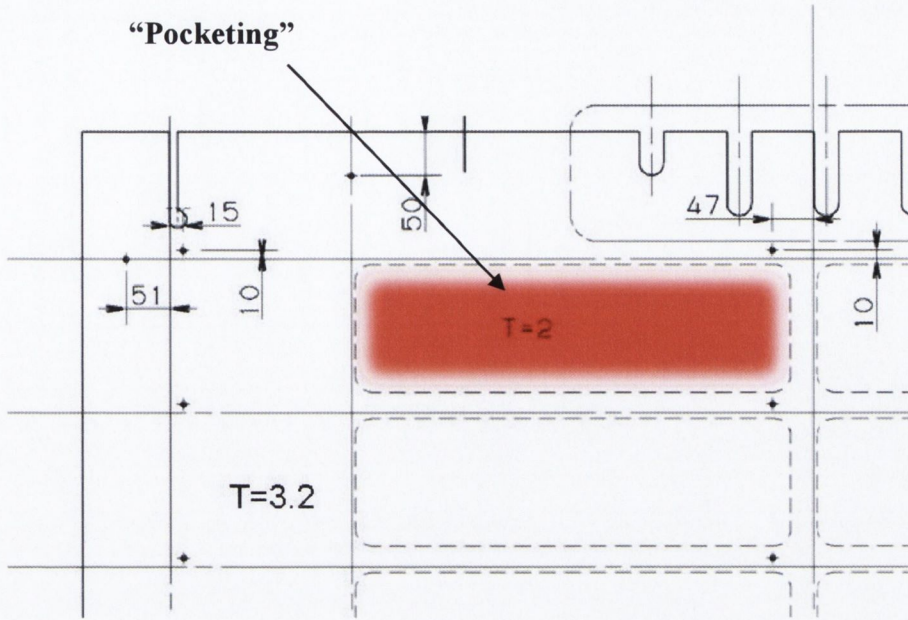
Example of change in skin thickness or "pocketing" due to chemical milling
